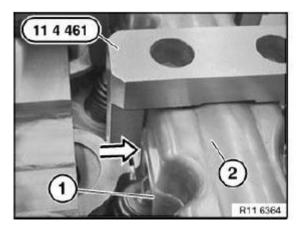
Identifying Upper Bearing Bank And Lower Bearing Bank Courtesy of BMW OF NORTH AMERICA, INC.
